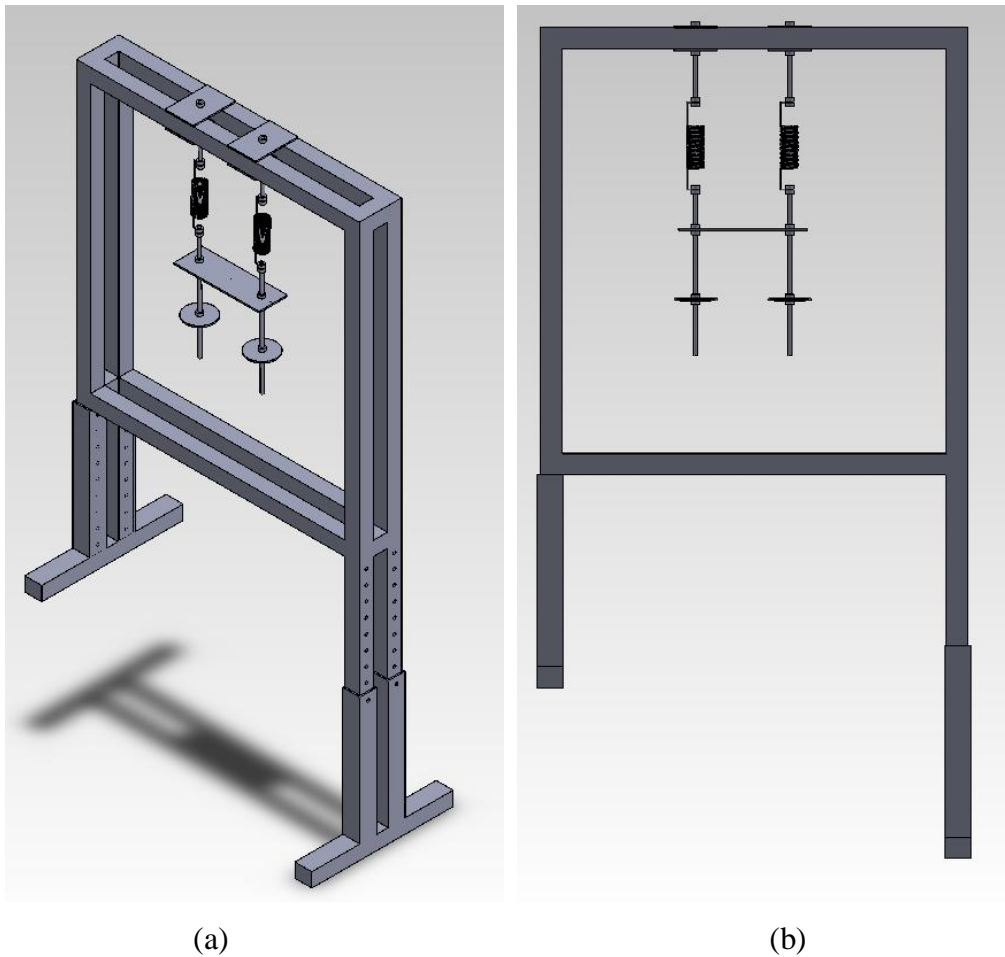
Design Concept 2 (a) isometric view, (b) front view
